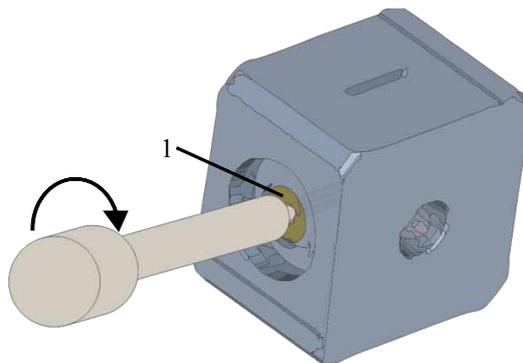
Removing the primary piston seal (1) from the displacement chamber
